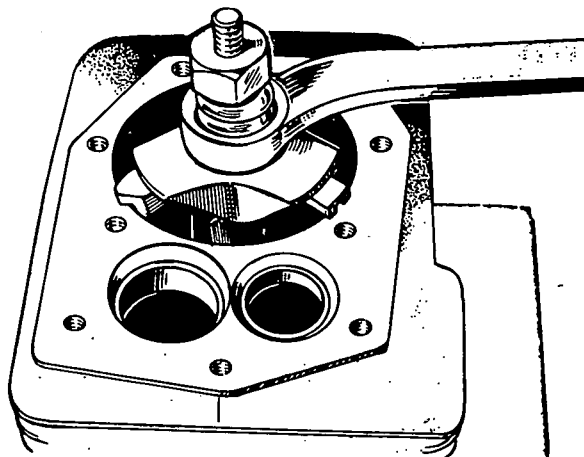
REMOVING RIDGE FROM THE CYLINDER
